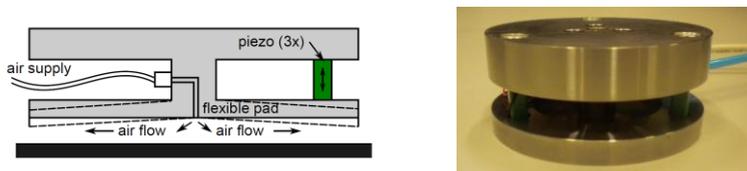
Active aerostatic bearing (a) sketch and working principle (b) prototype
